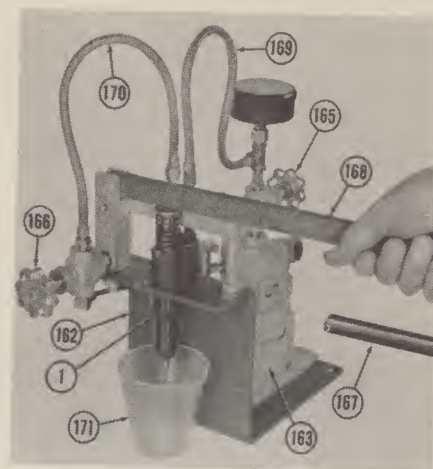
A—Test fixture set-up for popping the injector to check spray tip orifices.
